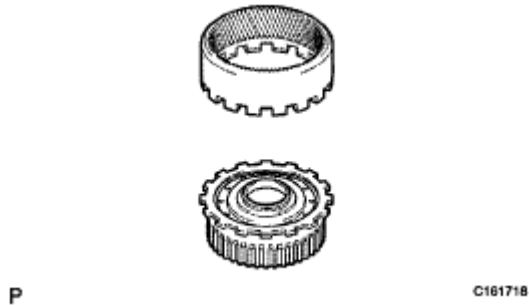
Identifying Front Planetary Ring Gear From Center Planetary Ring Gear
